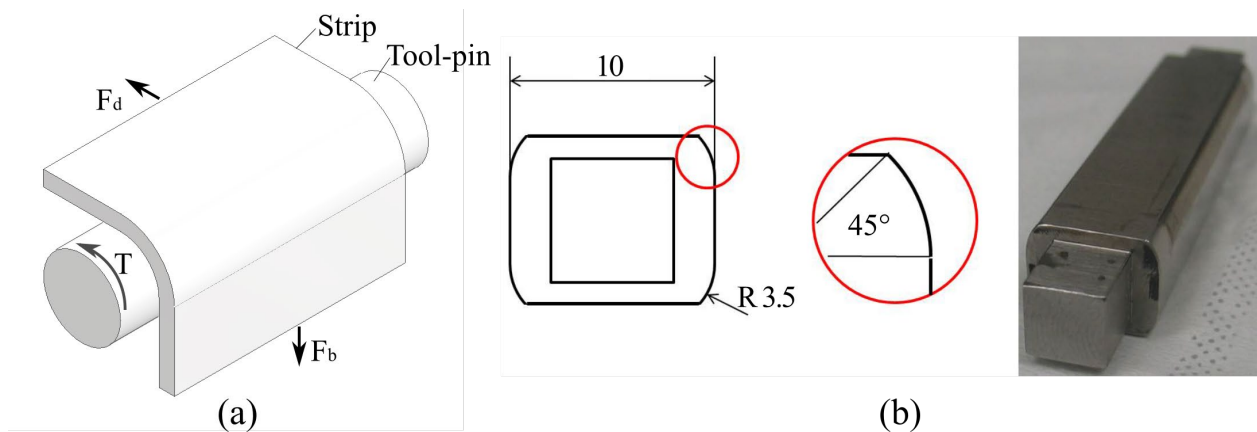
Principle of BUT testing. (a) A strip is bent over a tool-pin under a back-tension F_b . The drawing force F_d and torque T are measured and used as an indication of tool wear. (b) Geometry and appearance of tool-pin used in this work [17].
